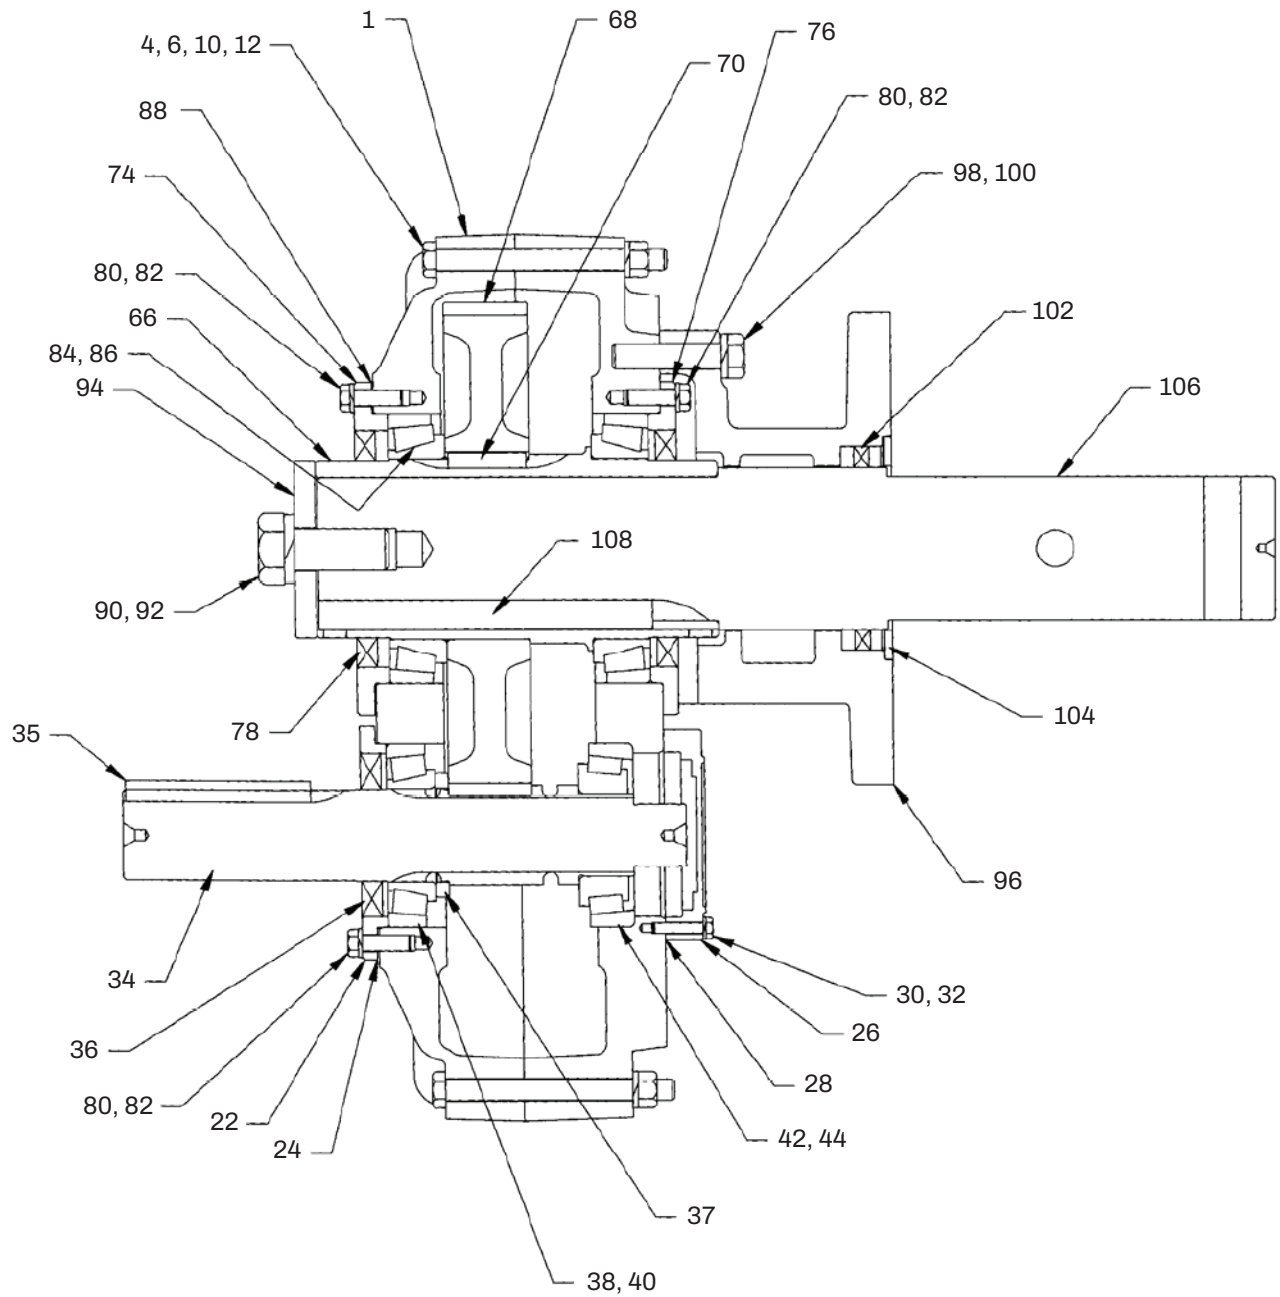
Parts for SCXT605 - SCXT705 Screw Conveyor Drive
